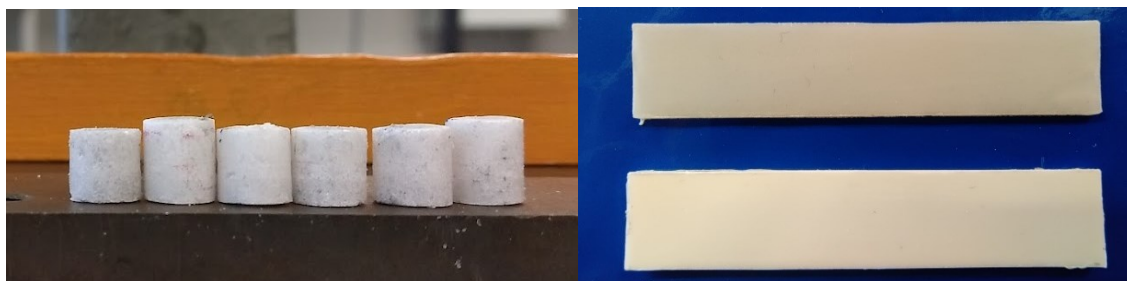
Pieces of rods in the mould and moulded plates.
